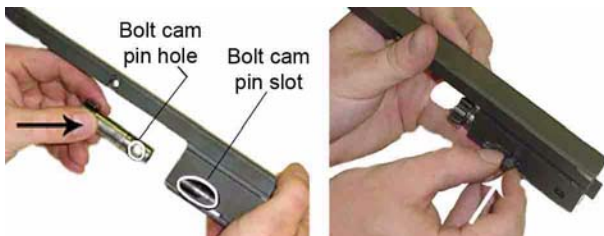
Re-install Bolt Assembly and Bolt Cam Pin.
